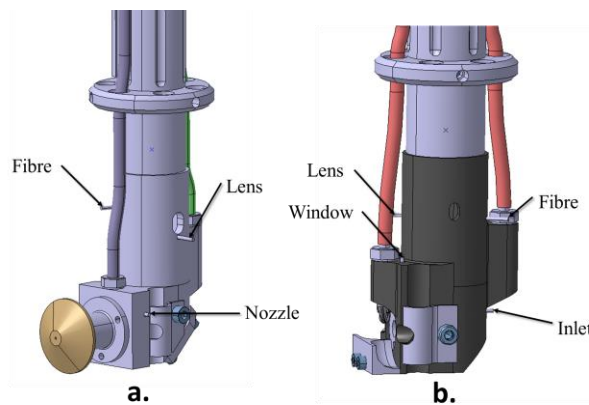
Thermocouple locations on the cutting (a.) and welding (b.) heads.
